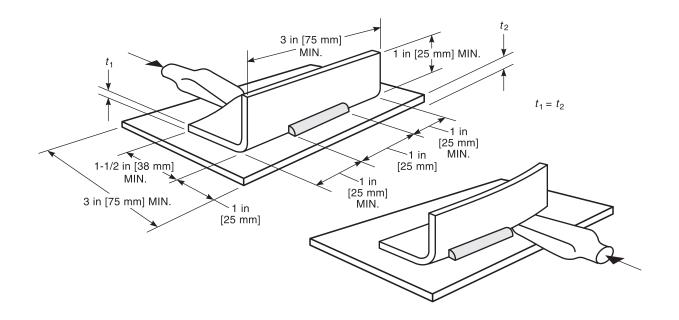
A—Test for Sheet to Sheet Flare-Bevel-Groove Welds [see 4.6.3.2(1)(a)]
